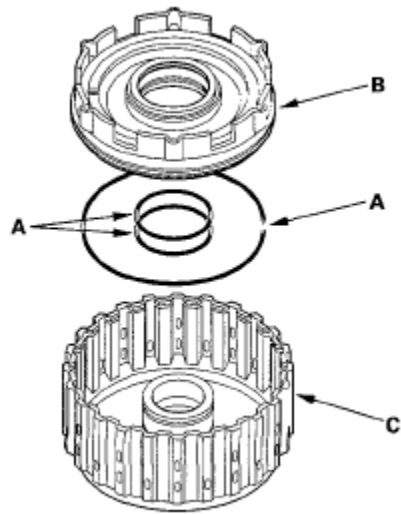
Identifying 1st Clutch Piston, 1st/1st-Hold Clutch Drum And O-Rings
